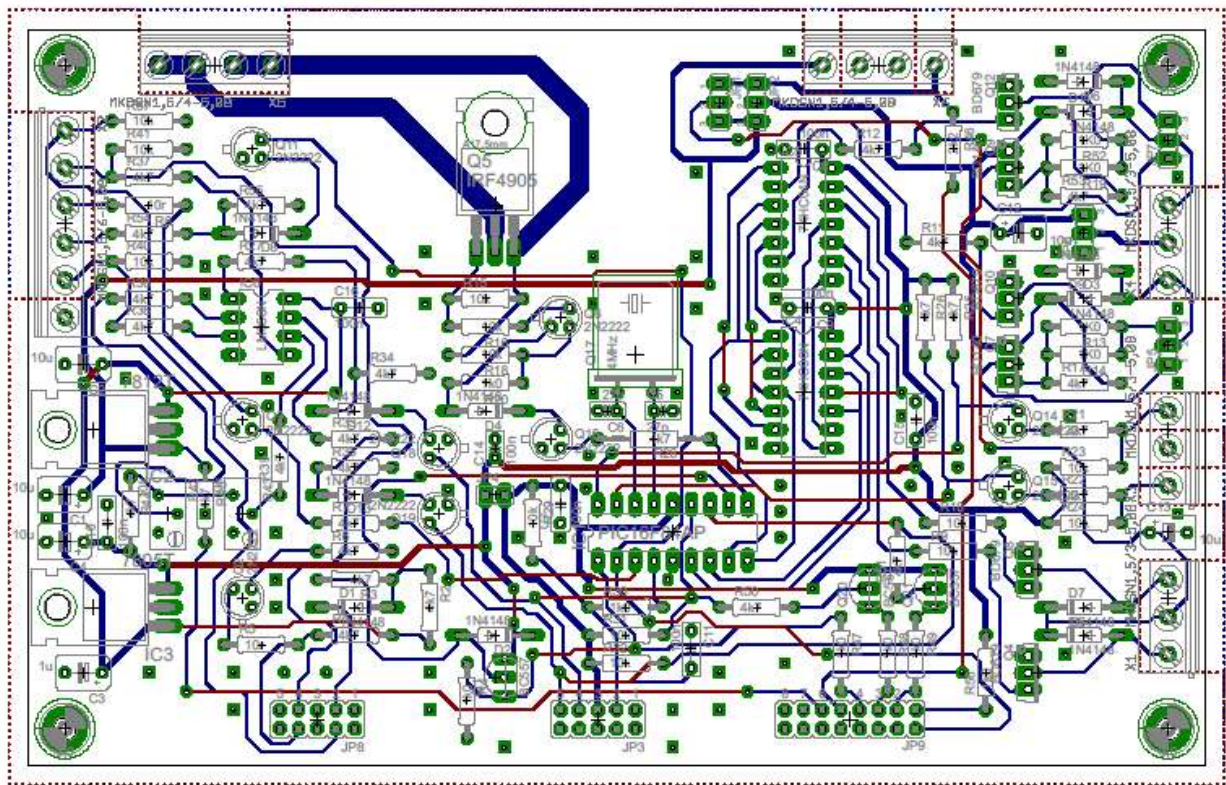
Topside view of the PCB layout showing components, tracks on both sides (blue on bottom of PCB), but without the groundplanes.
